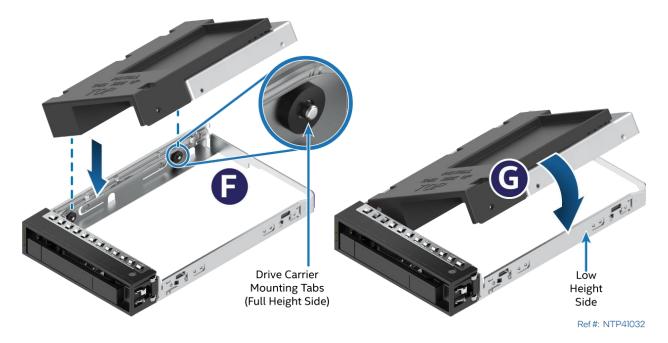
2.5" Drive Assembly Installation to Drive Carrier (Step 7)
